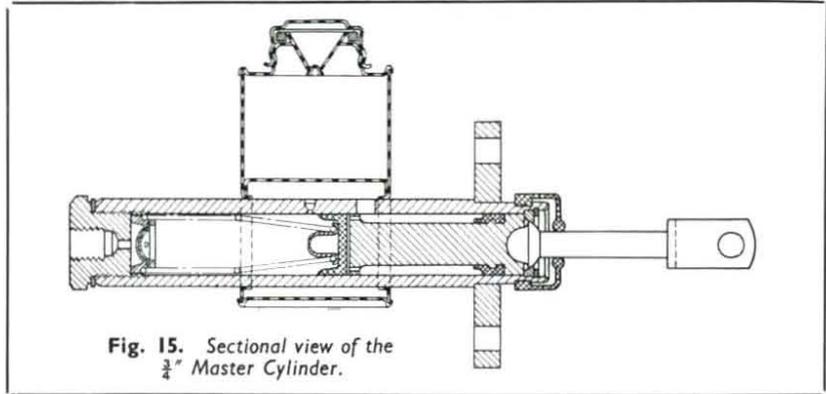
Sectional view of the $\frac{3}{4}$ " Master Cylinder.
